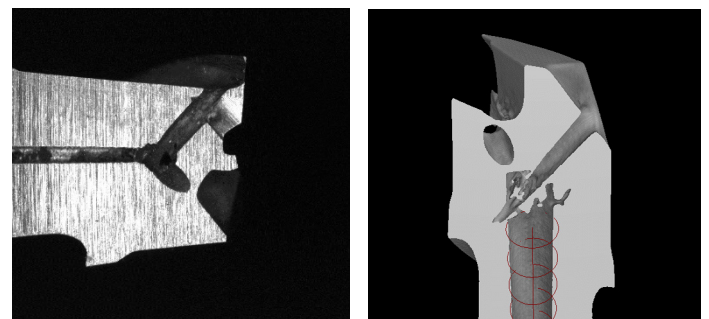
(a) (right) Section of \varnothing 2.5 mm tool, ground to 1 mm thickness; (b) (left) CT-scan of \varnothing 1.0 mm tool.
